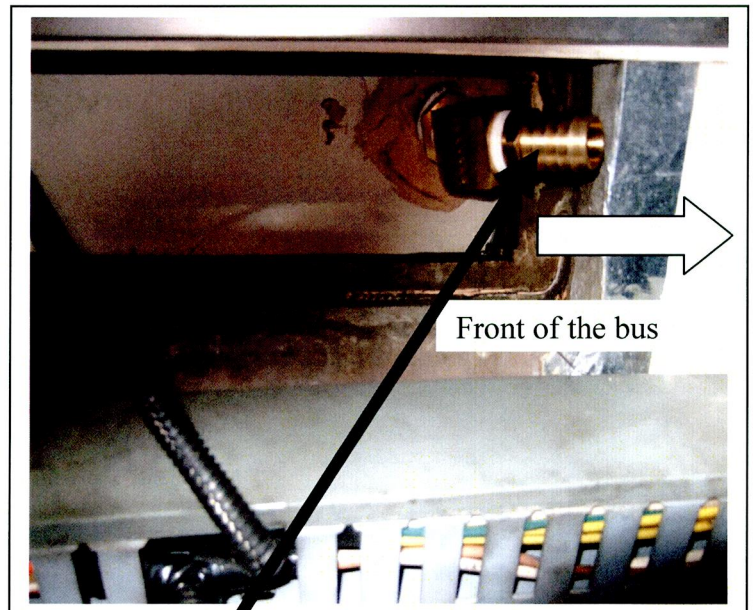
Now install/secure the hose barb fitting into the 45-degree fitting as shown above.
